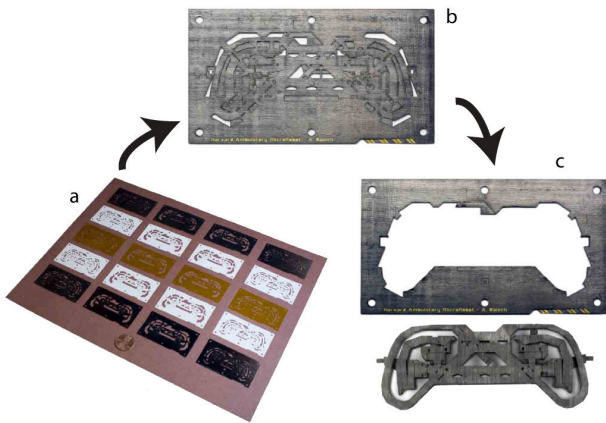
Manufacturing process for the pop-up HAMR-VP. 23 material layers, 20 continuous sheets (a) and 3 tack-bonded adhesive layers, are laser machined and laminated to produce (b). A second laser-machining step releases the HAMR-VP structure (c), allowing initial pop-up assembly.
